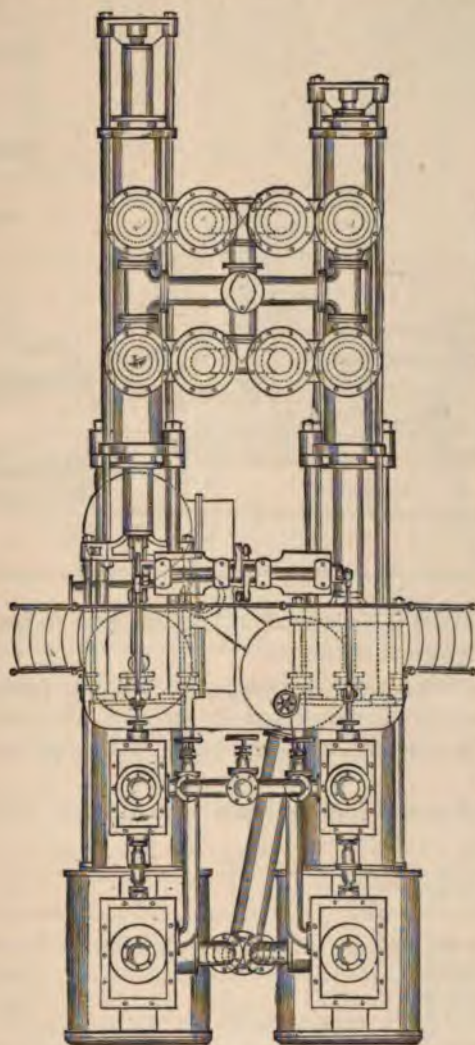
Worthington Compound Condensing High-pressure Pumping Steam Engine: Plan.
